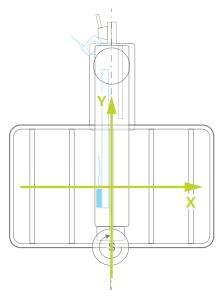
Plan view of a rapid radial drilling machine with counting direction
